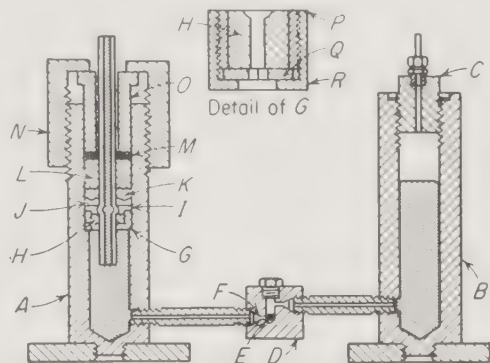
Cross-sectional view of compressor. [From W. B. Kay and G. M. Rambosek, *Ind. Eng. Chem.*, 45:222 (1953).]
